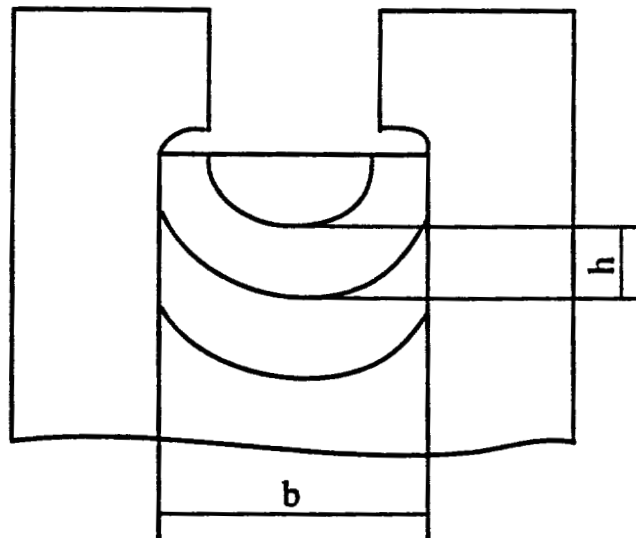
Weld Pool Shape During Electroslag Welding Process
